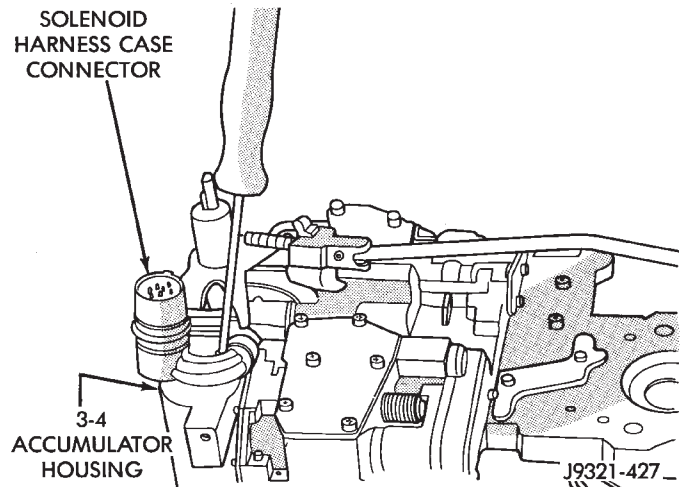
Removing/Installing Solenoid Harness Case Connector Shoulder Bolt
